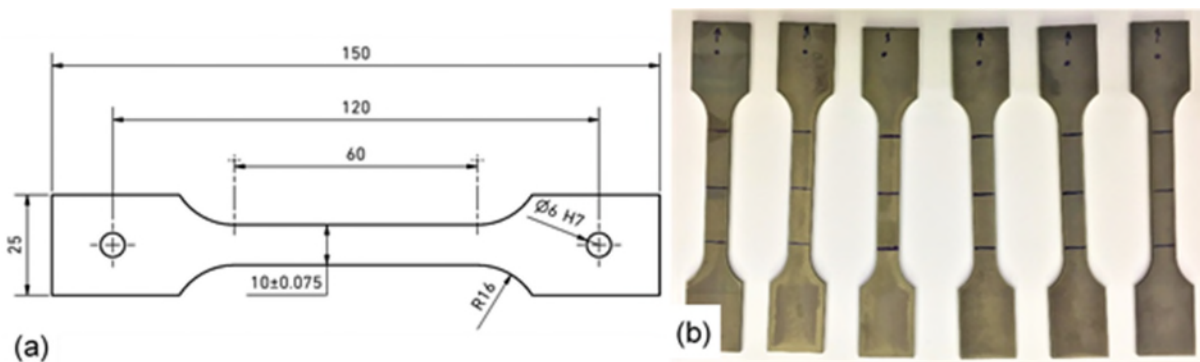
Tensile test specimen geometry; (a) dimension, and (b) cut samples.
